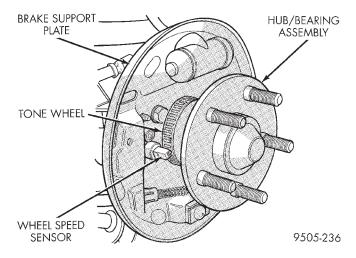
Rear Wheel Speed Sensor With Drum Brakes
